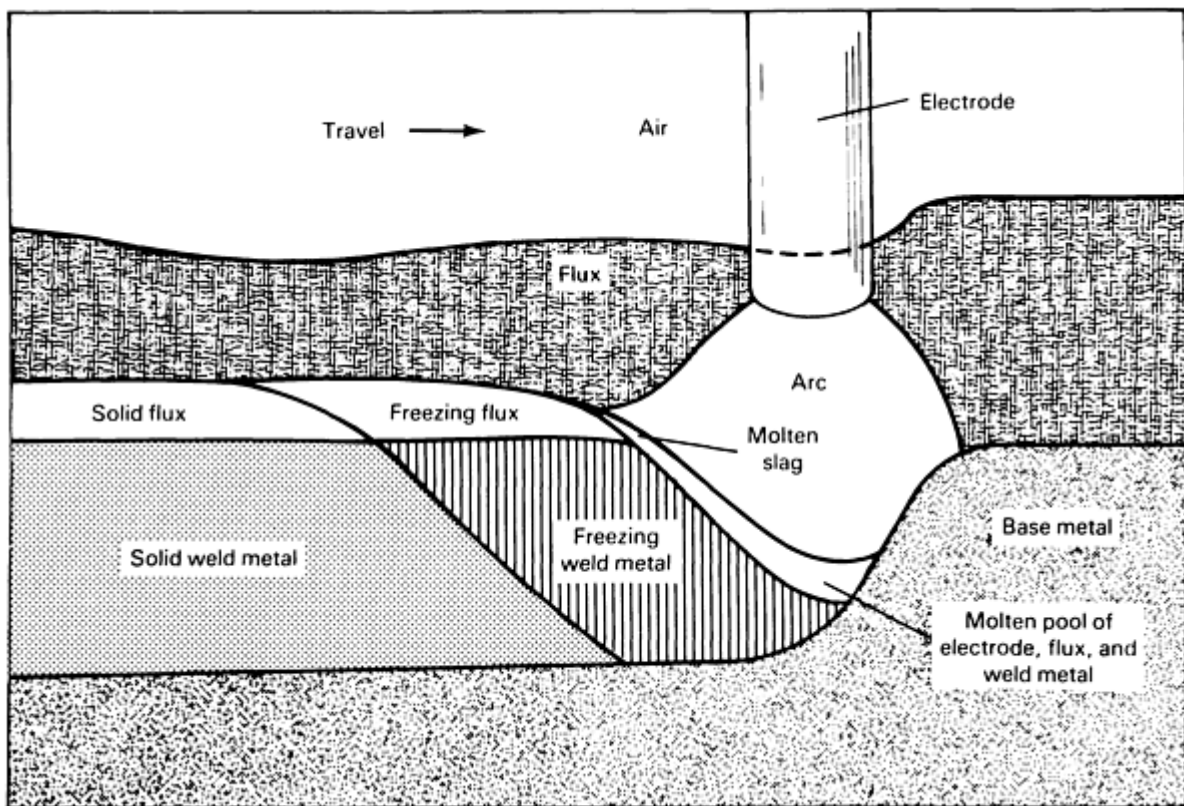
SCHEMATIC SHOWING TYPICAL WELD POOL DYNAMICS OF A SUBMERGED ARC WELD
